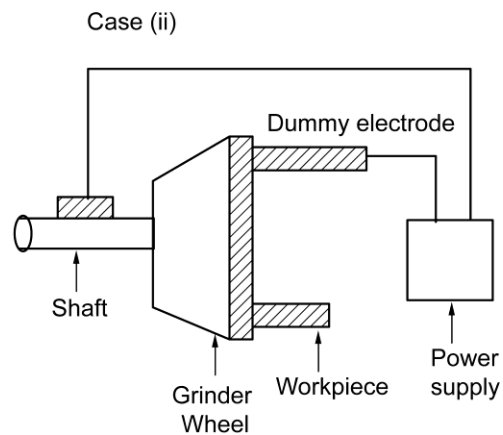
Configuration of electrically conducted wheel and nonconductive workpiece
